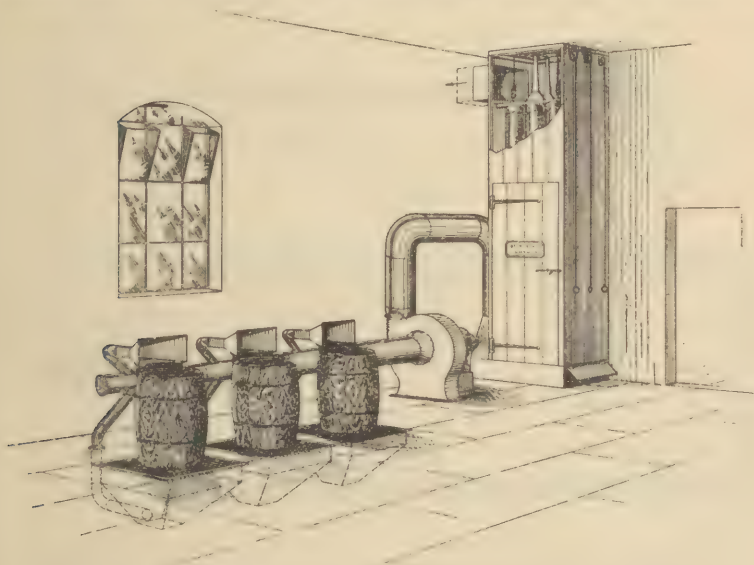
STURTEVANT PNEUMATIC DUST COLLECTING SYSTEM.
